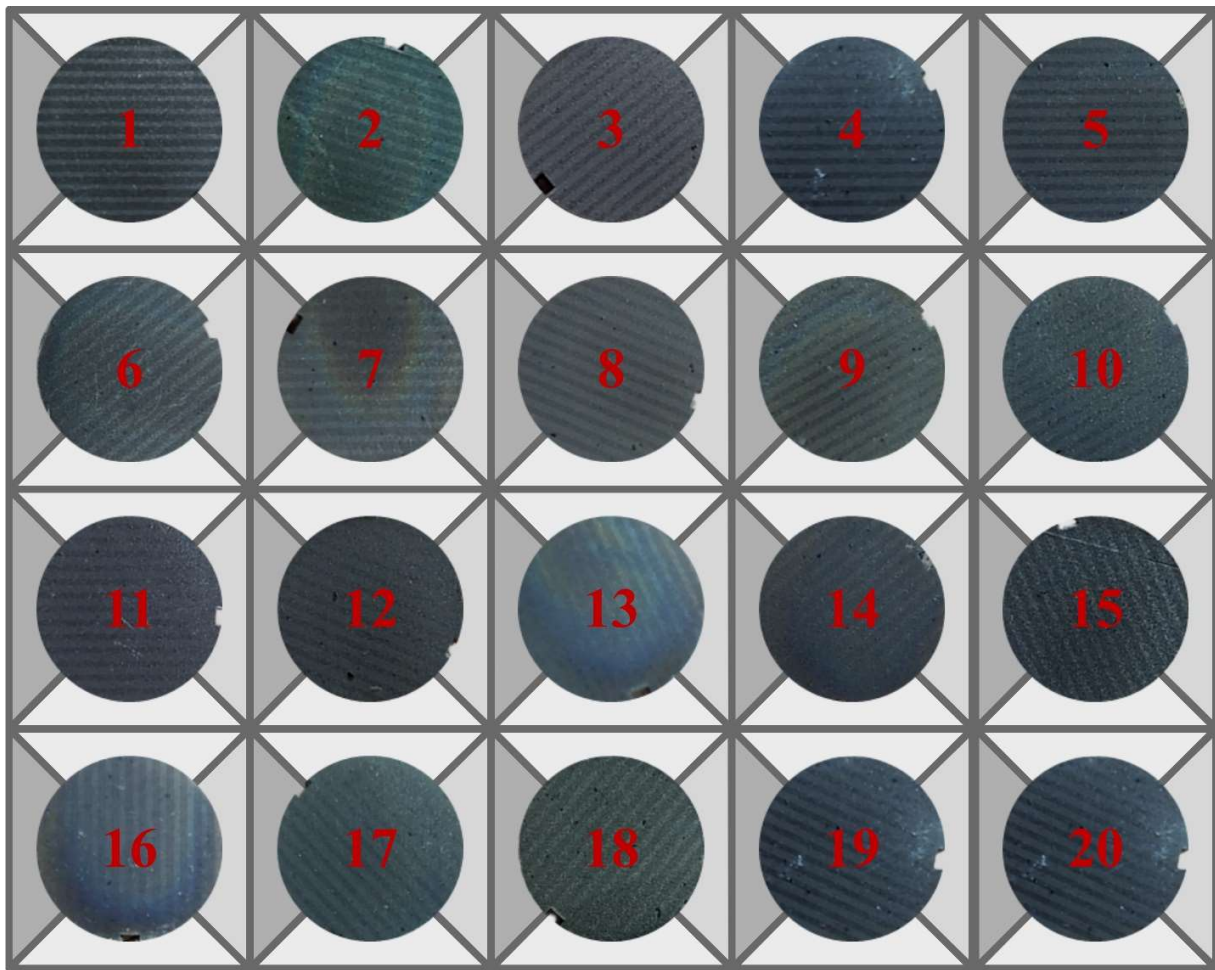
20 Samples cutting on the medium-speed WEDM machine.
